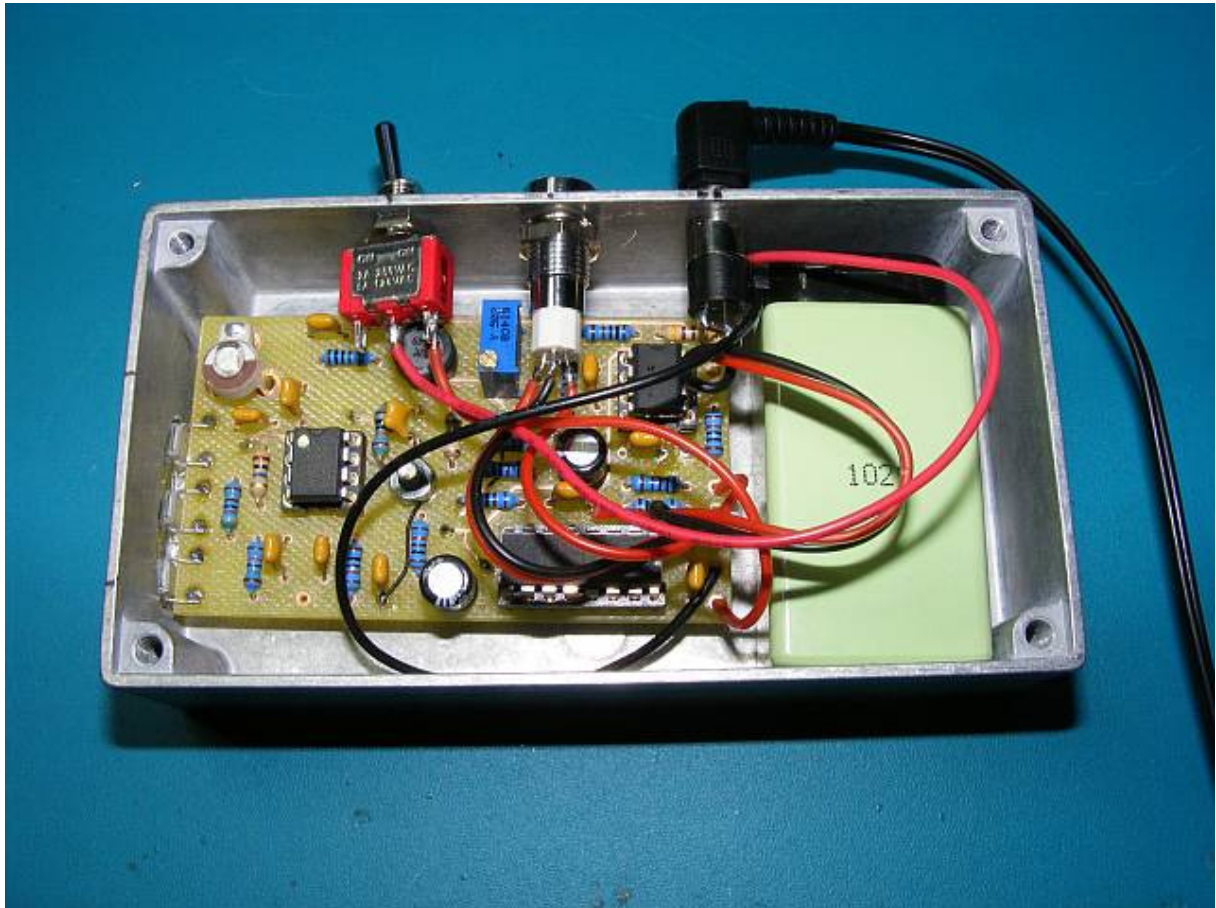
Interior of the „Stuttgarter Geigerle“ with the PCB for through hole assembly and a 9.6V rechargeable NiMH block battery
